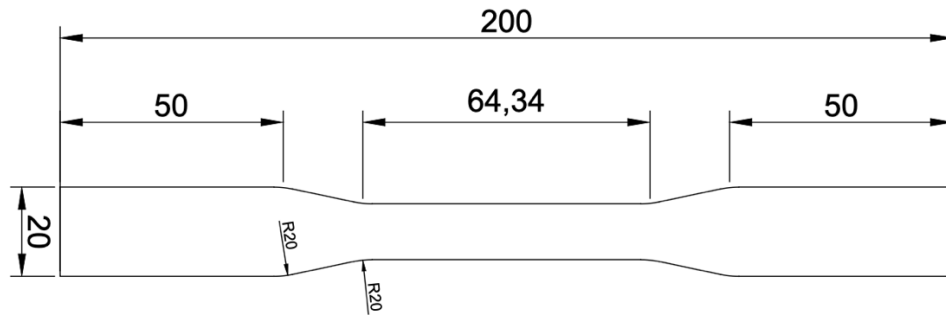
Schematic of the standardized dog-bone tensile test specimen geometry (all dimensions in mm)
